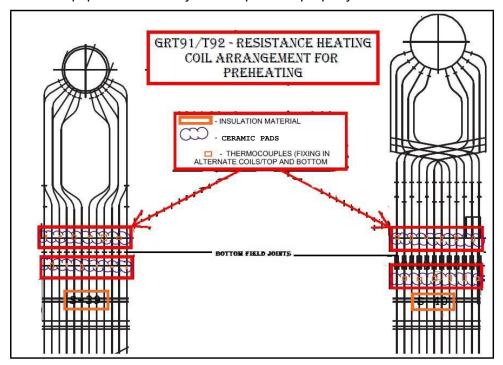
Resistance heating Coil arrangement for Preheating of T91/T92 tube assembly
